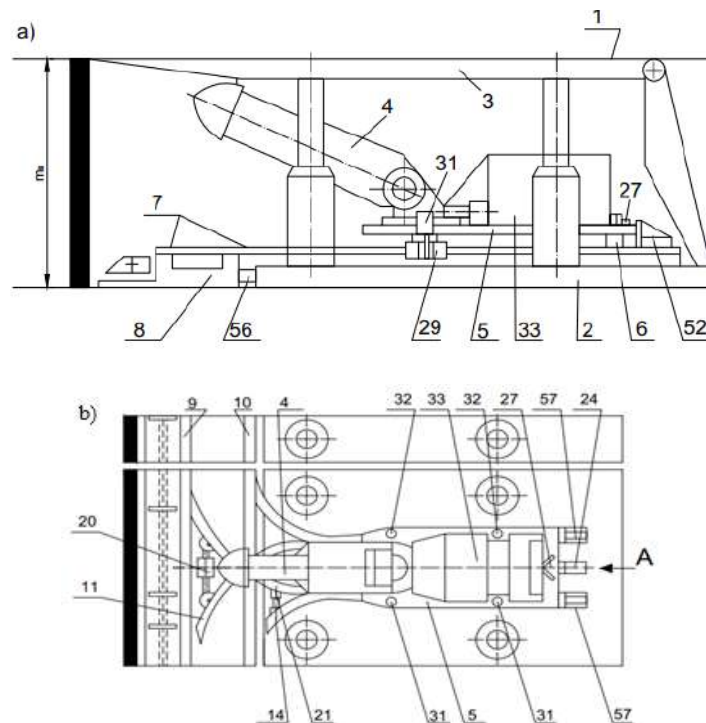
Section of mechanized support with VMF-5 manipulator: (a) general view of the KRS complex; (b) top view
